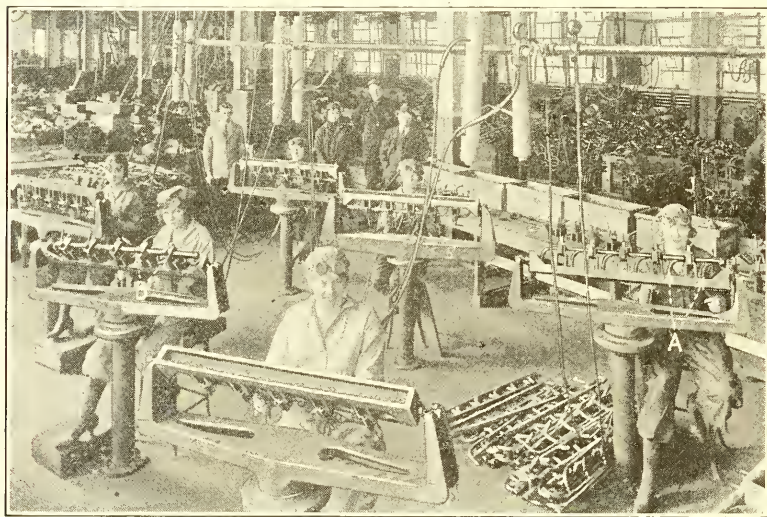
Fixtures Used in Welding Liberty Motor Manifolds.
